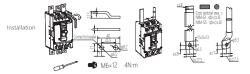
NXM-63/NXM-125 connecting plate and wiring dimension
